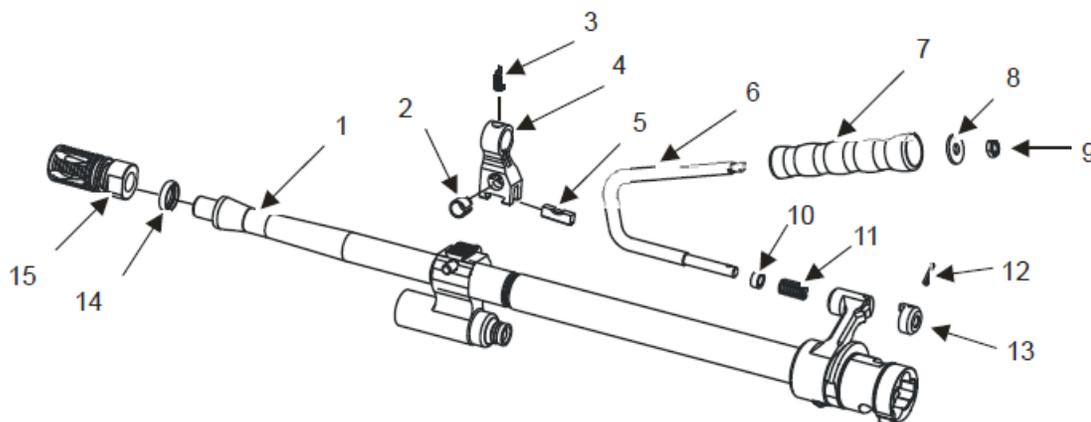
Additional Authorized Equipment, Short Barrel Assembly 12556953.
